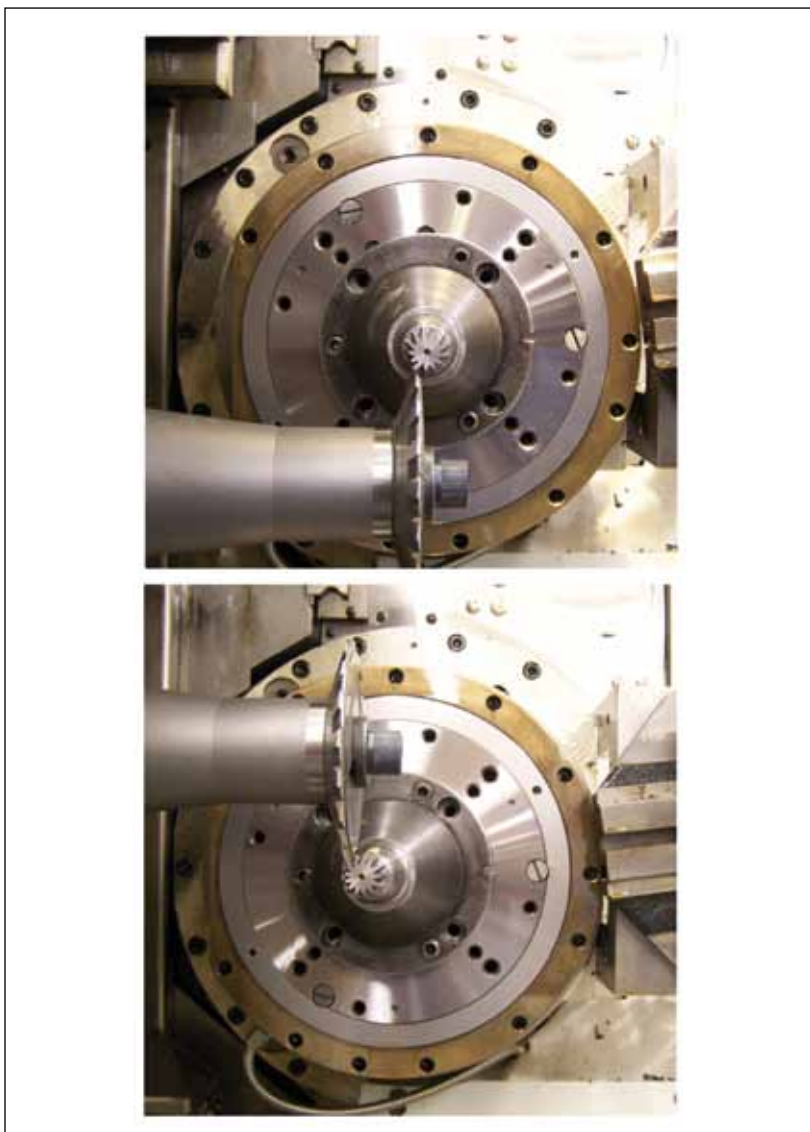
Straight bevel gear cutting with disc cutter (top: lower flank, bottom: upper flank).
